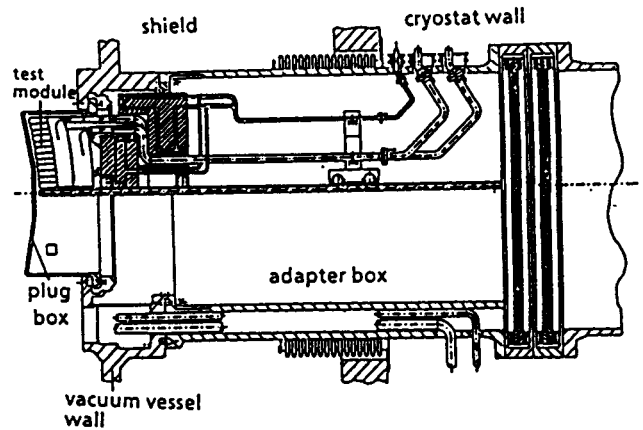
Test Module for the Self-Cooled Pb-17Li Blanket Concept
